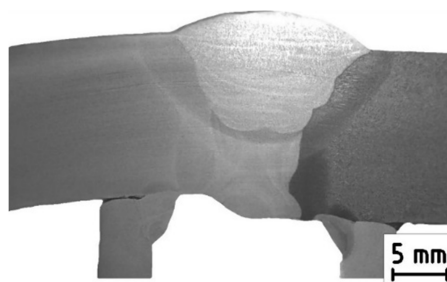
Macrograph of butt weld joint between cylindrical (left) and sphere-like (right) part of the sleeve.
